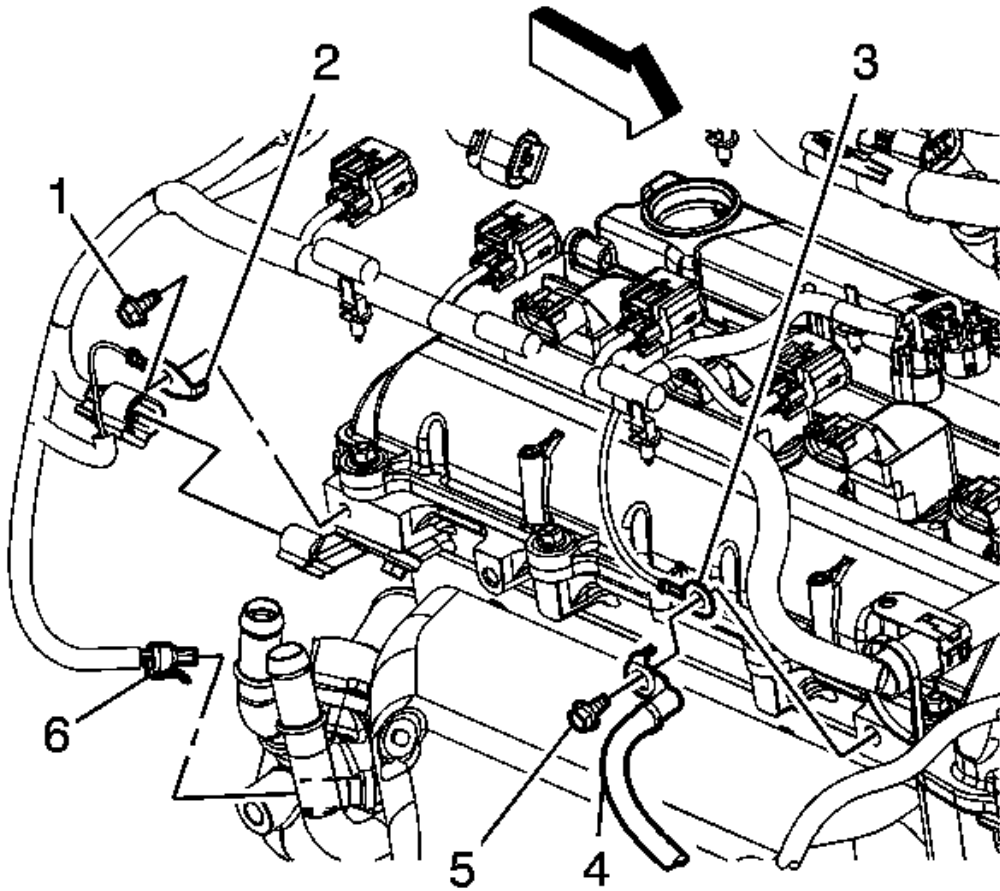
View Of CMP Sensor & ECT Sensor Electrical Connectors
